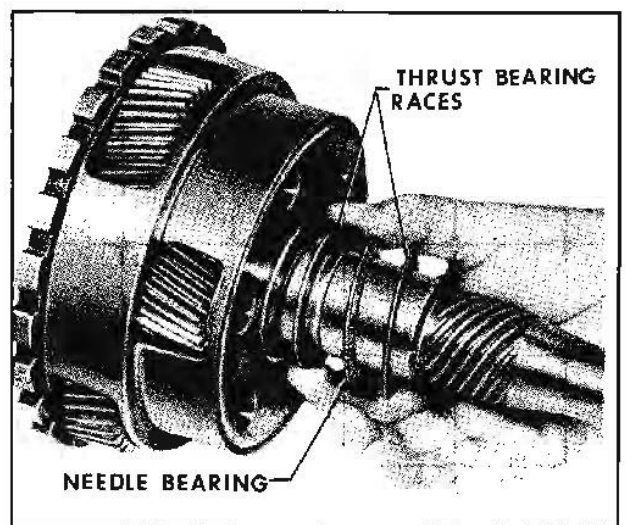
B-125 Installing Planet Carrier Thrust Bearing and Races
